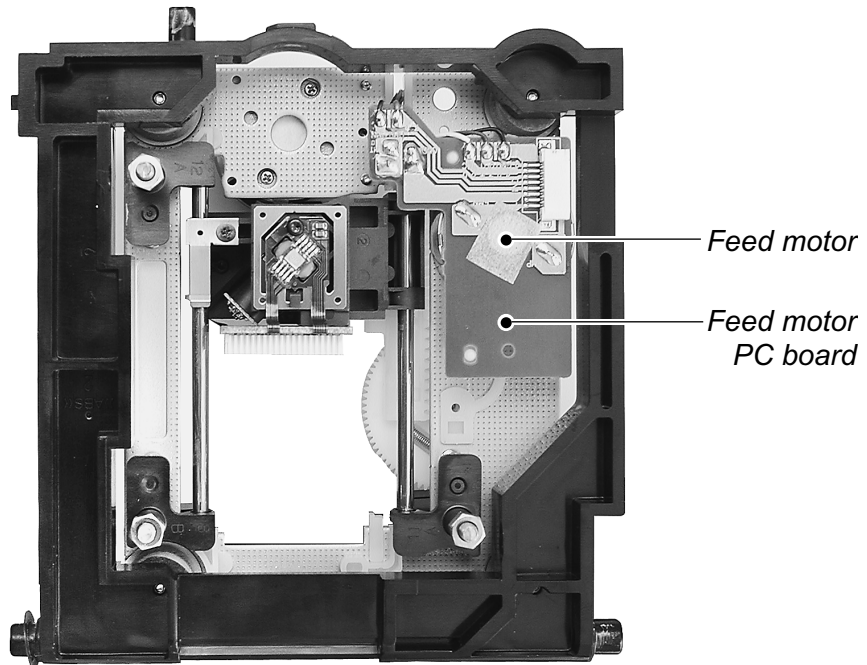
Pickup mechanism chassis assembly (Bottom side)
